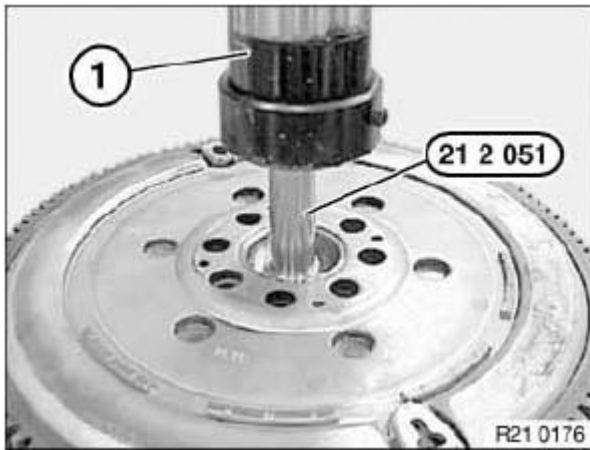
Identifying Special Tool (21 2 051) And Hydraulic Press
